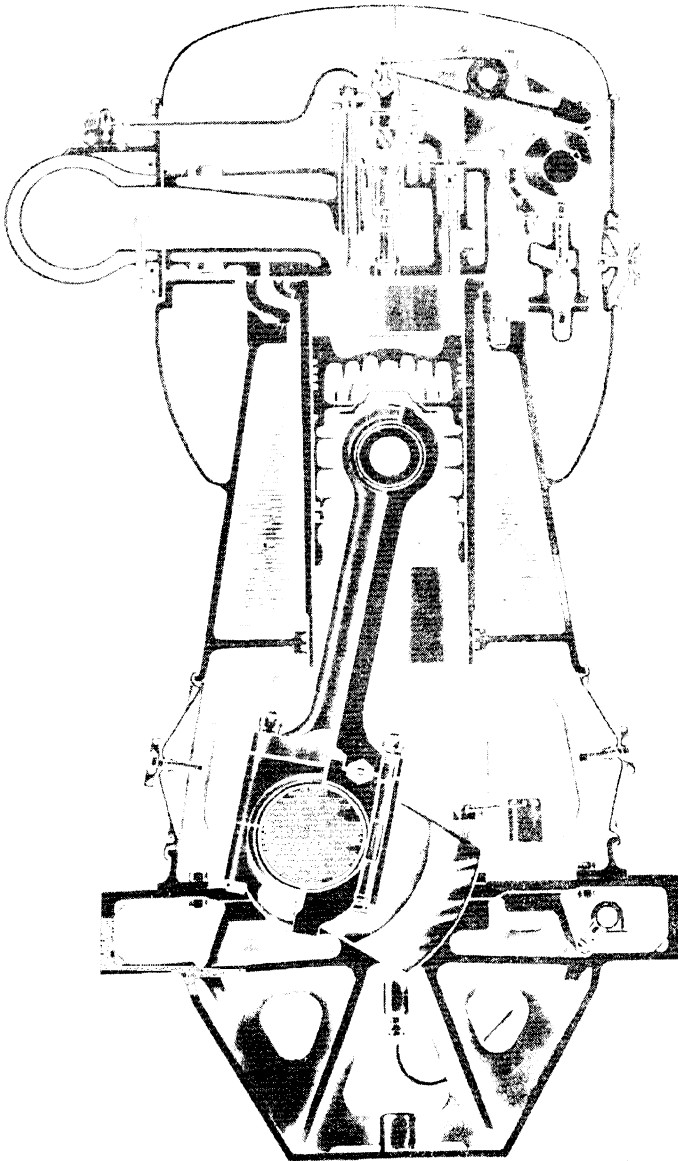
This heat-treated cylinder and frame (Hendy Series 50) Diesel cylinder block is fabricated and constructed of welded heavy steel plate, and stresses relieved with heavy cross members to support the main bearings. The cylinder block is bolted onto the base and carries the cylinders and all other parts of the engine.
